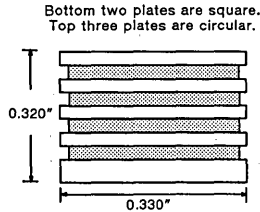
Aluminum Circular Fin Heat Sink for 64 QFP Package (Motorola H00809A001)
